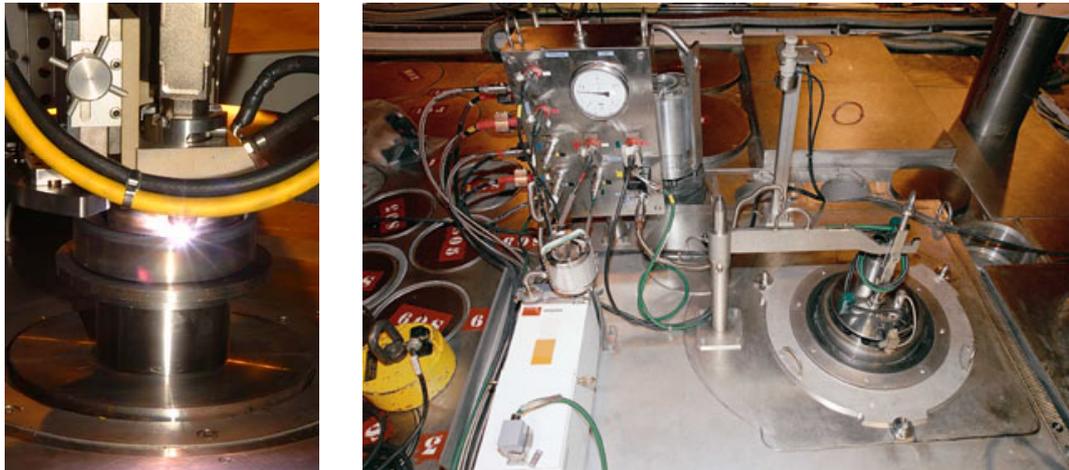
TIG welding equipment for containerization in ISAI.
